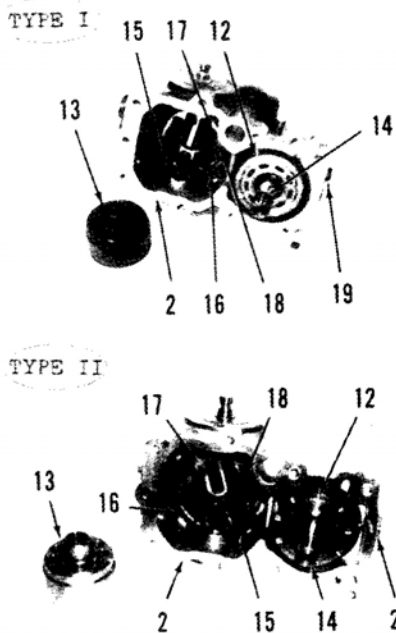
View showing rear of hydrostatic transmission with port block removed.
